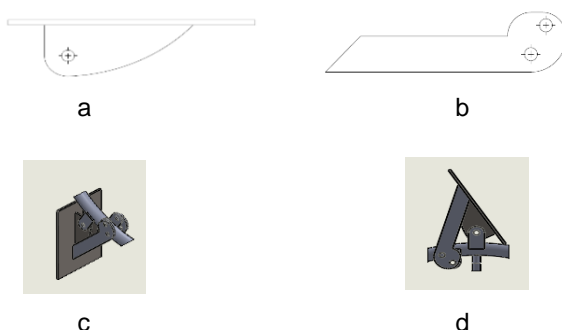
Lugs with additional plates (a) and the angle adjustment lugs (b), The angle adjustment mechanism (c) and number of lugs mechanism (d).
